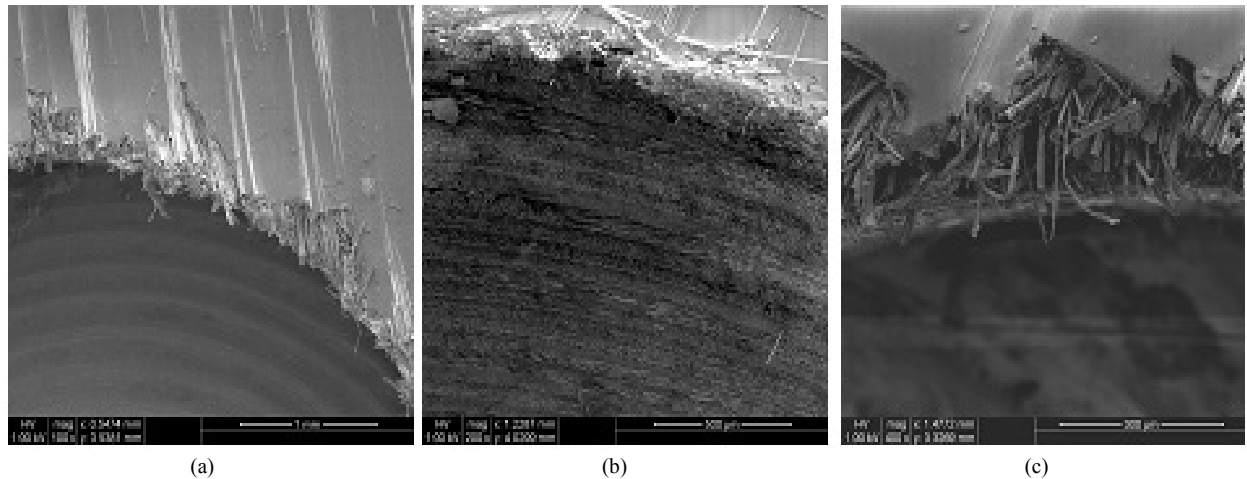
Defects on the PCM part edges appearing during machining-milling and drilling
